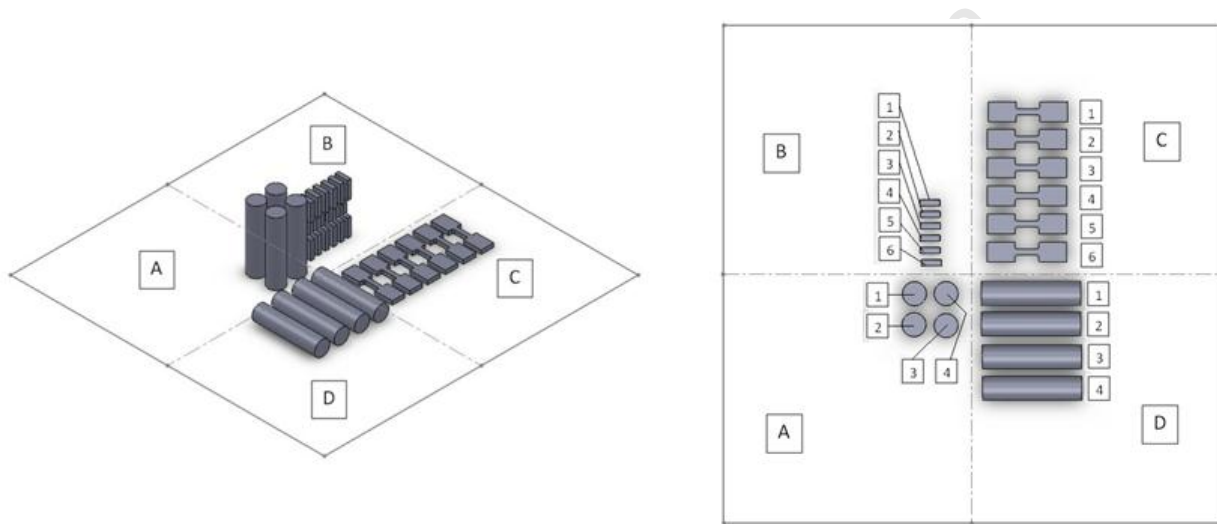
Isometric and plan view of the build platform and the sector divisions A, B, C, D and the specimen labels.
